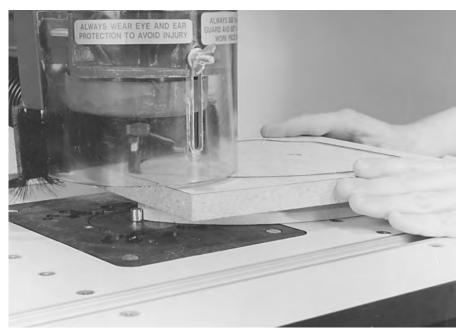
Run the edge of the product against the guide pin to cut a matching groove in the laminate side of your fixture.
